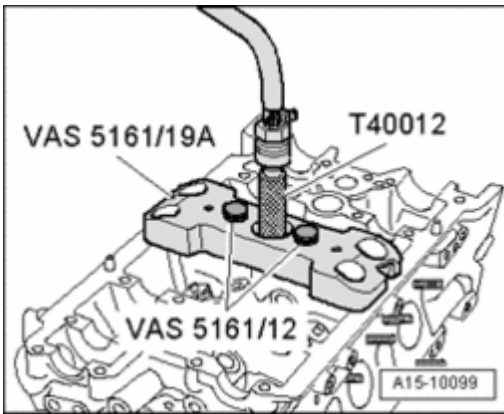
Placing Guide Plate VAS 5161/19 A From Valve Cotter Disassembly And Assembly Device VAS 5161 On Cylinder Head
